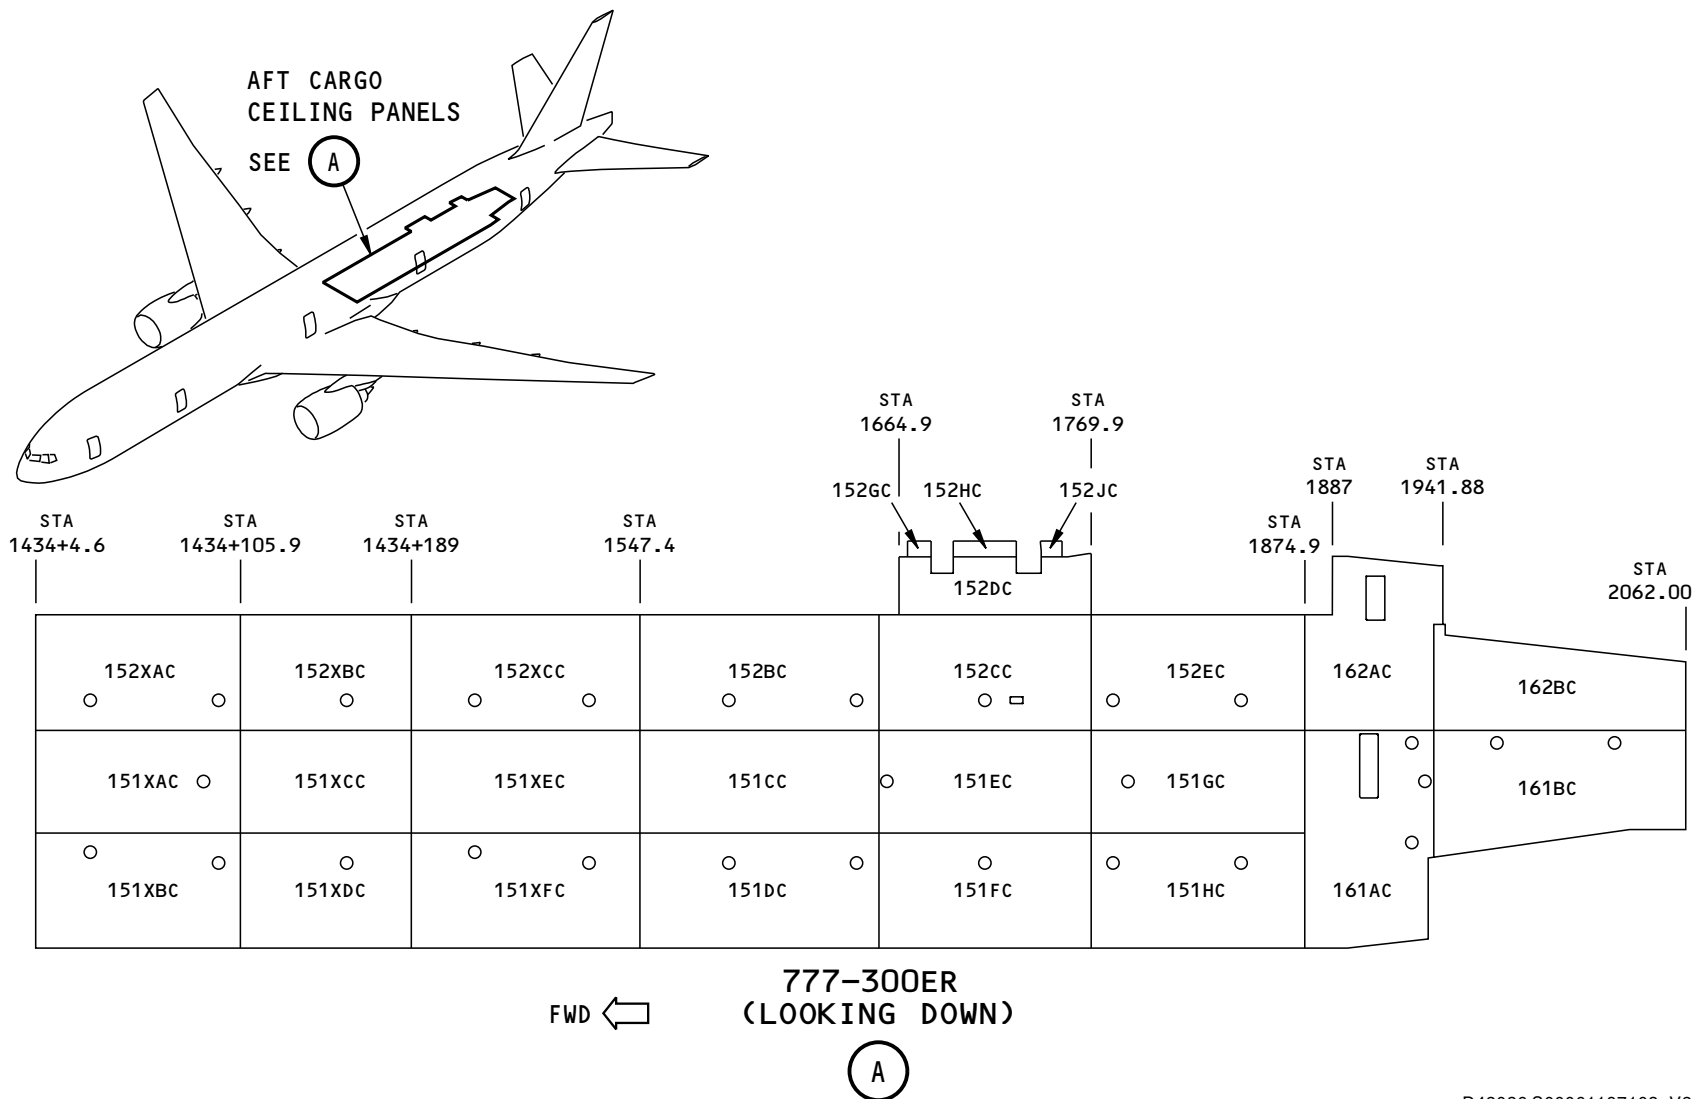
ZONE 151/152, 161/162 AFT CARGO CEILING PANELS
